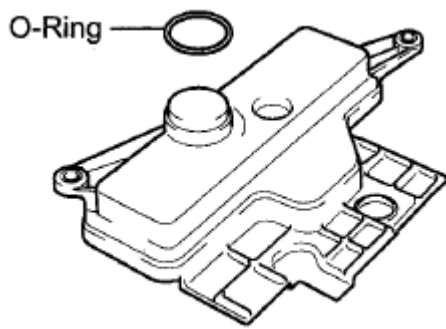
Locating Valve Body Oil Strainer Assembly Bolts
